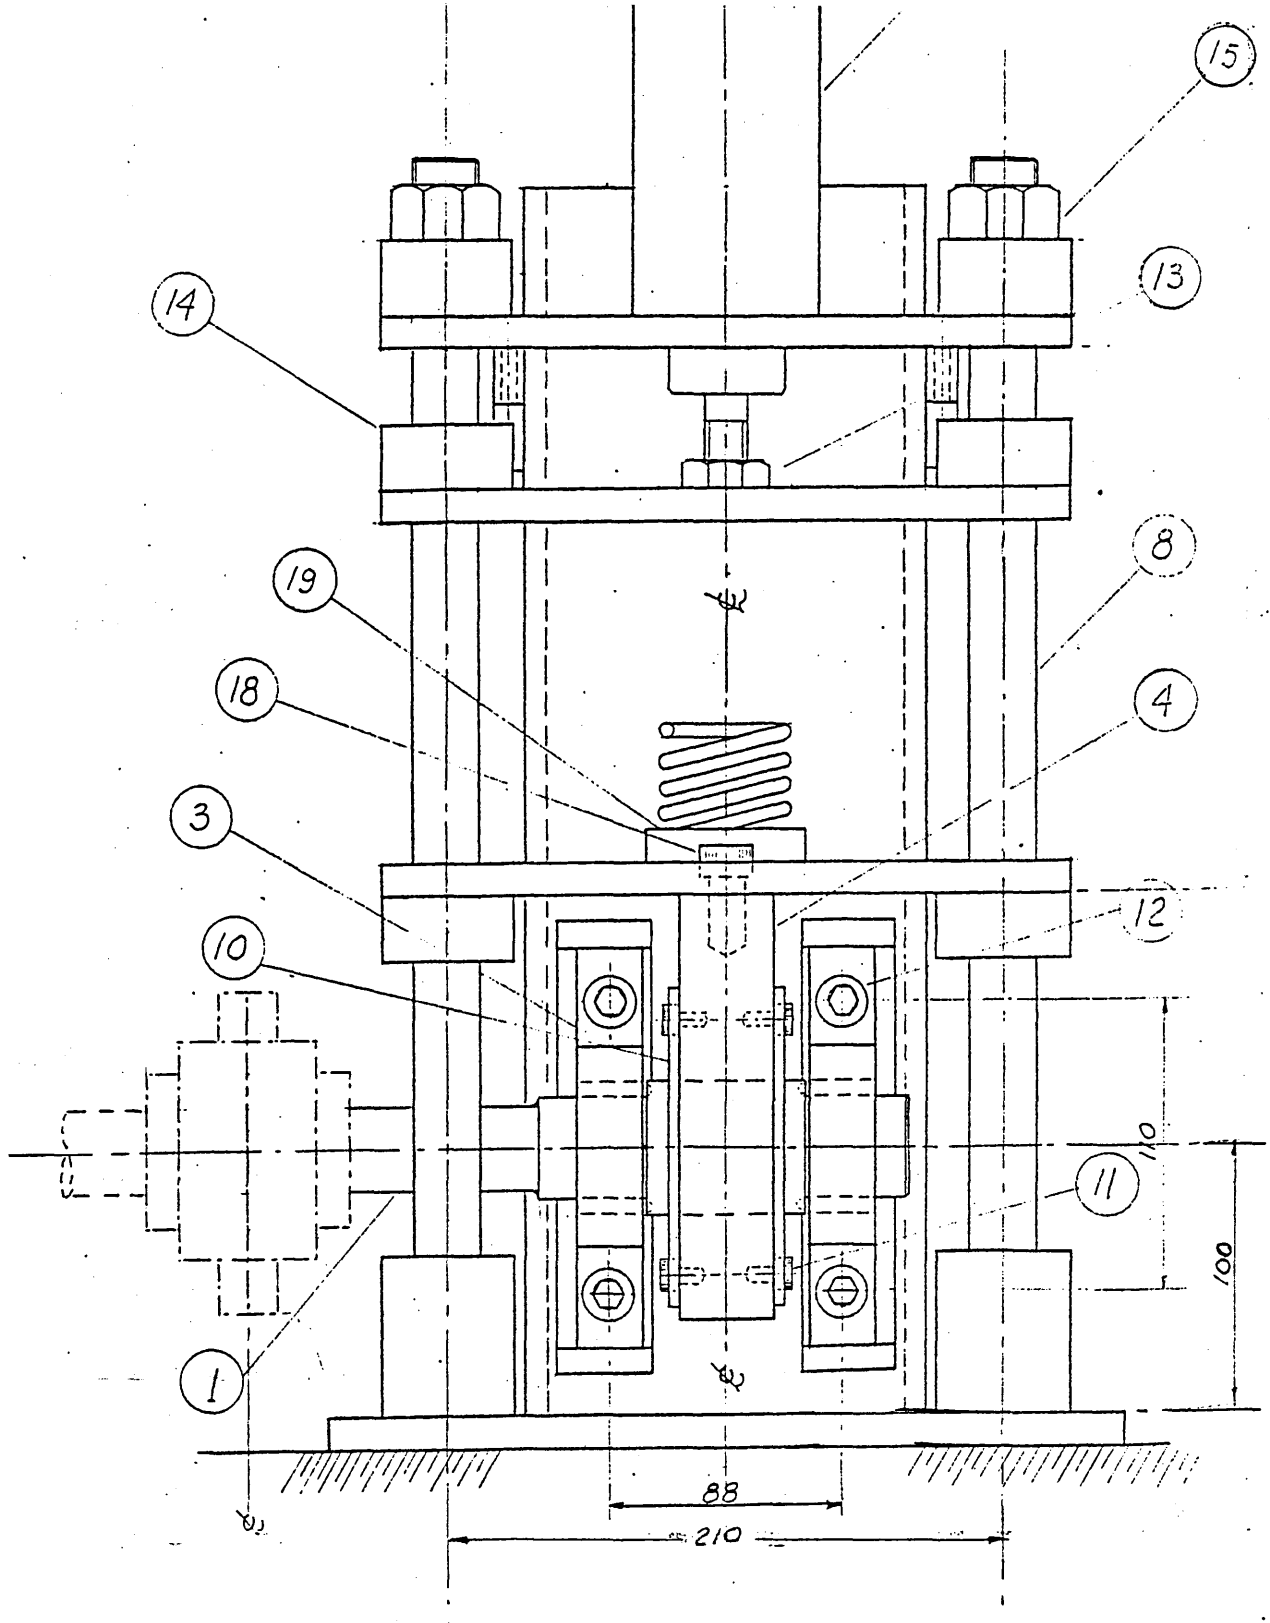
BEARING UNIT AND LOAD SYSTEM.
